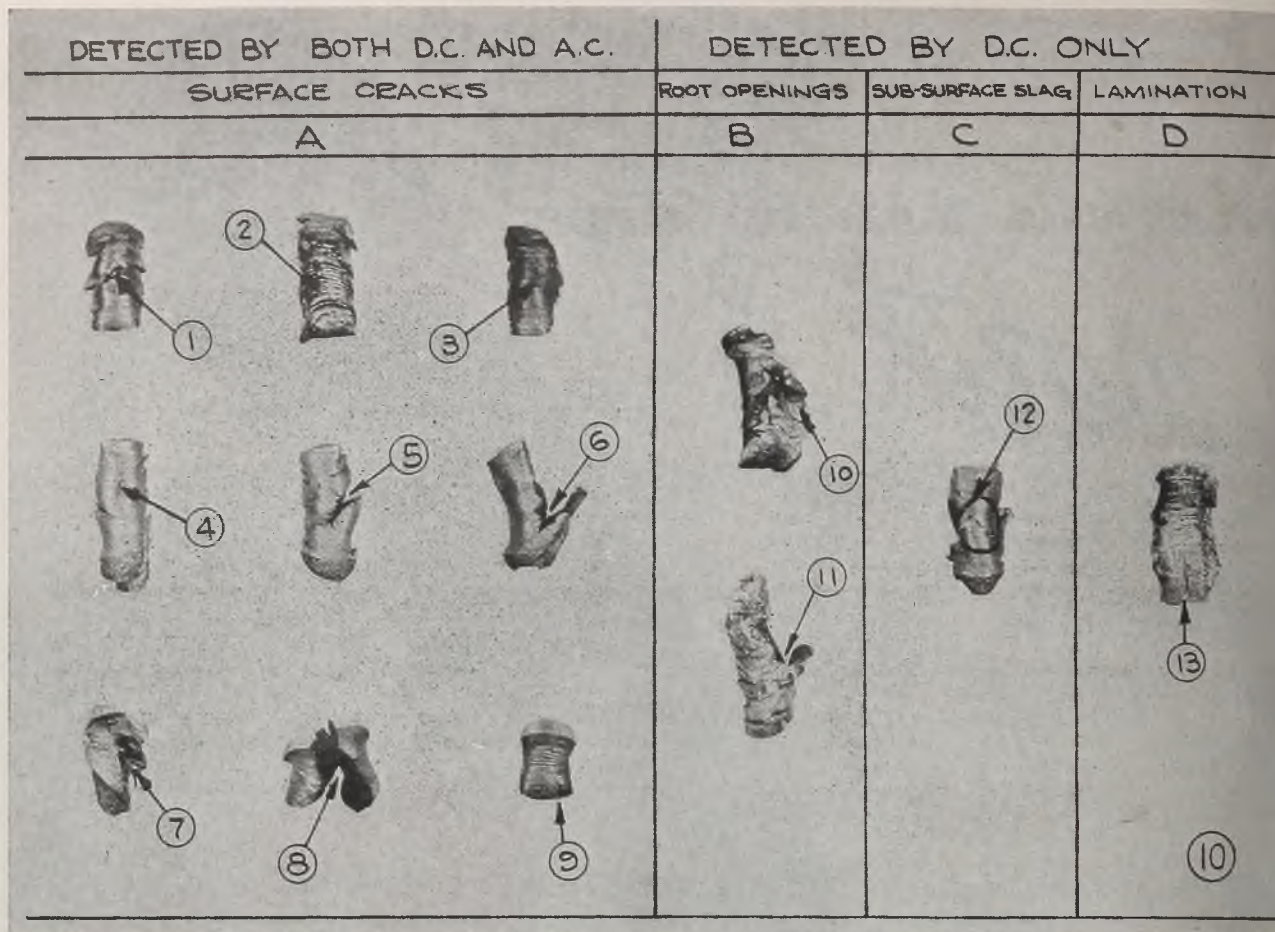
Typical surface cracks, root openings and subsurface slag in welds, also lamination on plate edge as observed by chip inspection
